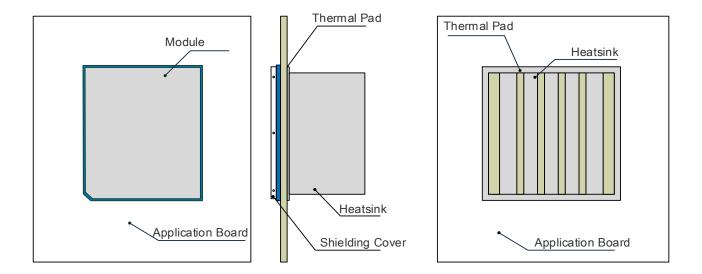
Reference Design of Heatsink (Heatsink at the Backside of PCB)
